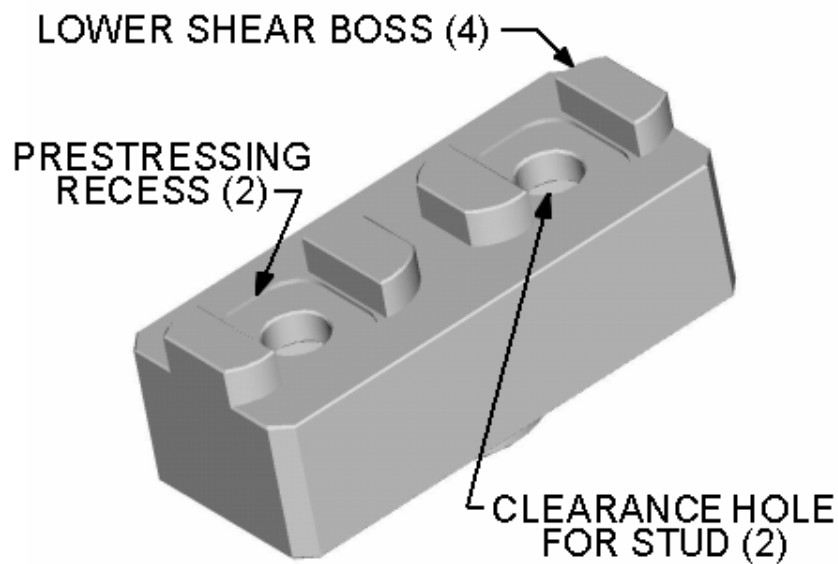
Medium-Duty Fitting, Bottom Surface showing Lower Shear Bosses and Prestressing Recesses
